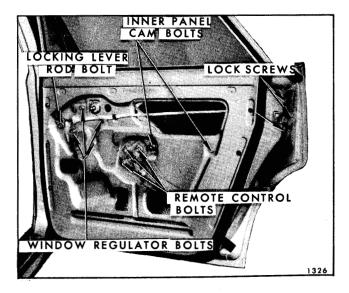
Rear Door Hardware - "A" Styles Shown
